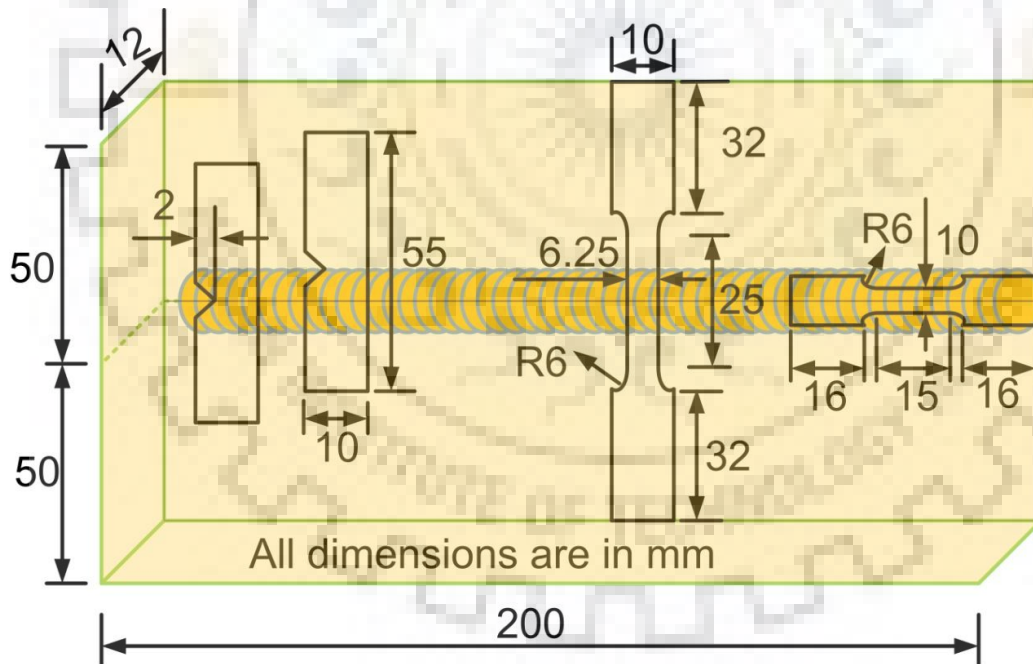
Schematic of the welded plate showing locations and dimensions of Charpy toughness and tensile test specimens
